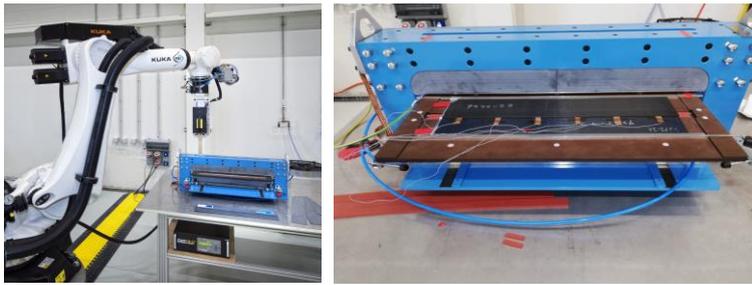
Robotic Induction Welding setup with standard SLS weld tool at NLR
